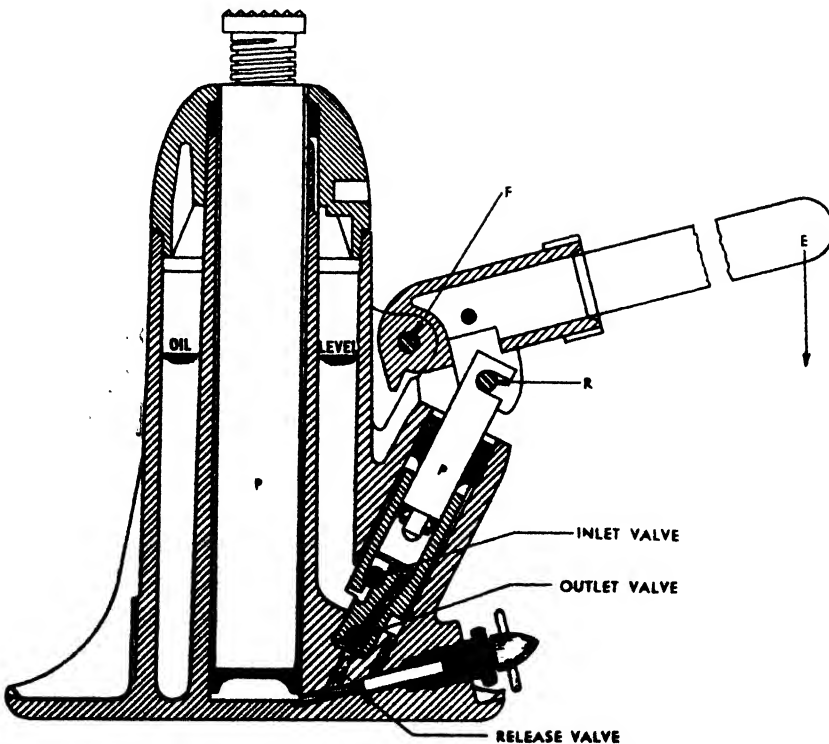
B. SECTIONAL VIEW OF A HYDRAULIC JACK.
